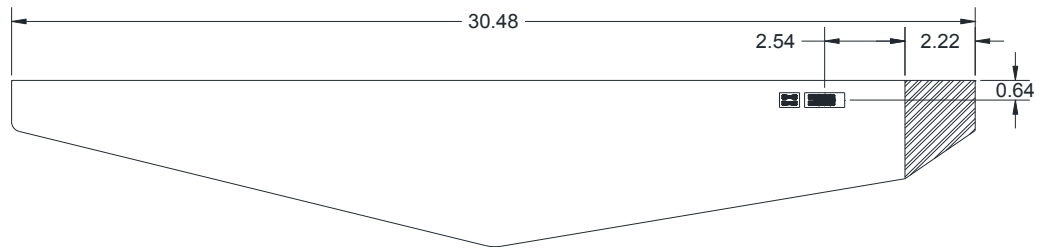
Carbon/Epoxy Composite Blade with Sensor Layout (dimensions in cm)
